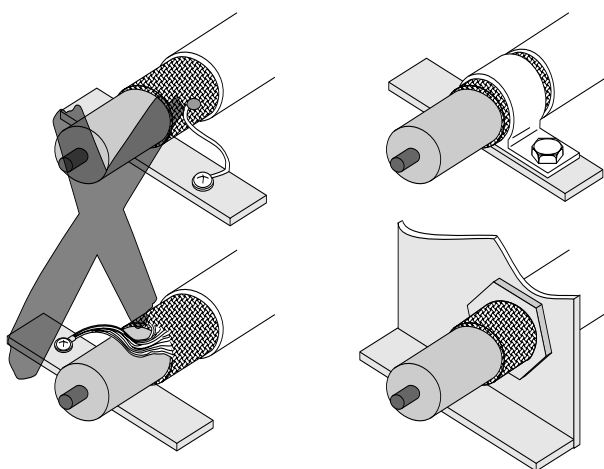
Examples of correct shield connection using metal clamp (shield clamp) or metal cable gland
